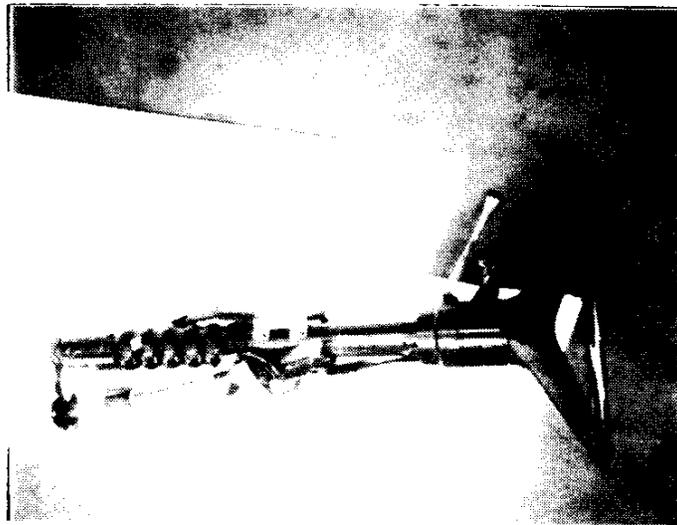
FLEXIBLE SHAFT TO ACCOMMODATE STEERING SHAFT OFFSET
